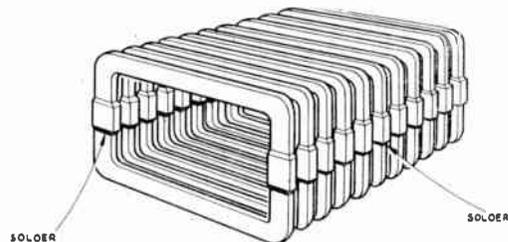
Assembly method for soldered bellows type of flexible waveguide.
